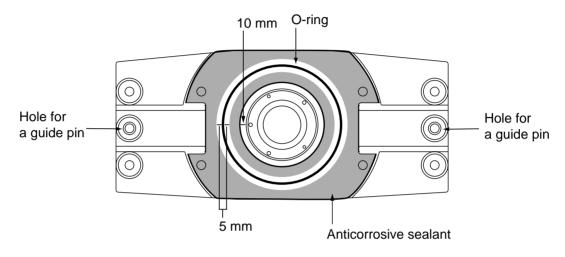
Coating the waveguide flange with anticorrosive sealant
